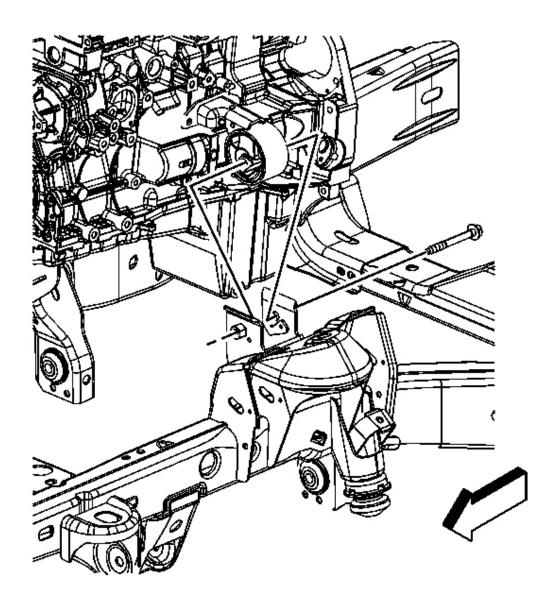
Locating Left Engine Mount-To-Frame Bracket Through Bolt Courtesy of GENERAL MOTORS CORP.
